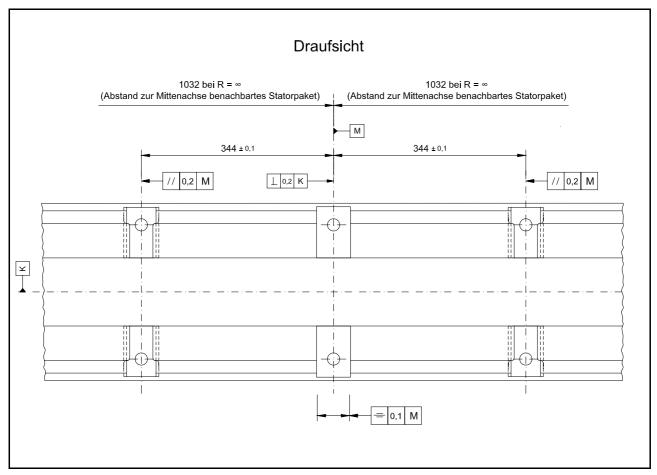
Dimensions and tolerances for designing stator plate incorporation in a steel construction (top view)
